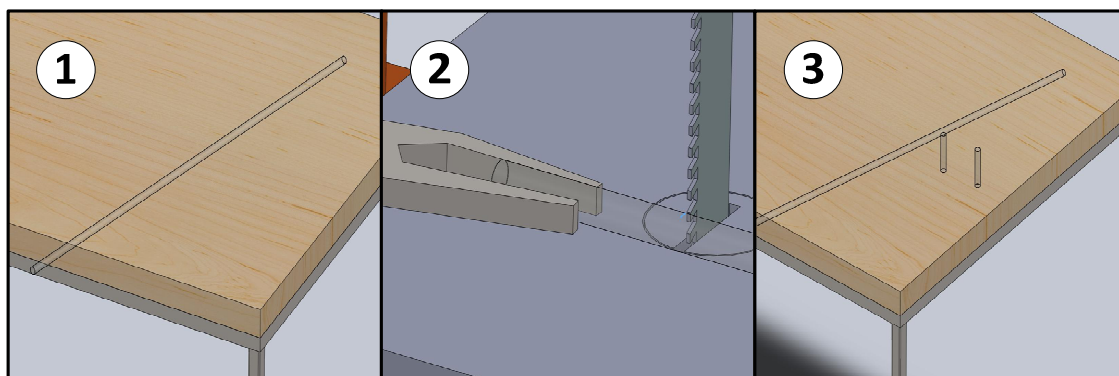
Cutting the rods- (1) Acrylic rod. (2) Lightly grip the rod with the pliers. (3) Two 3" pieces.
